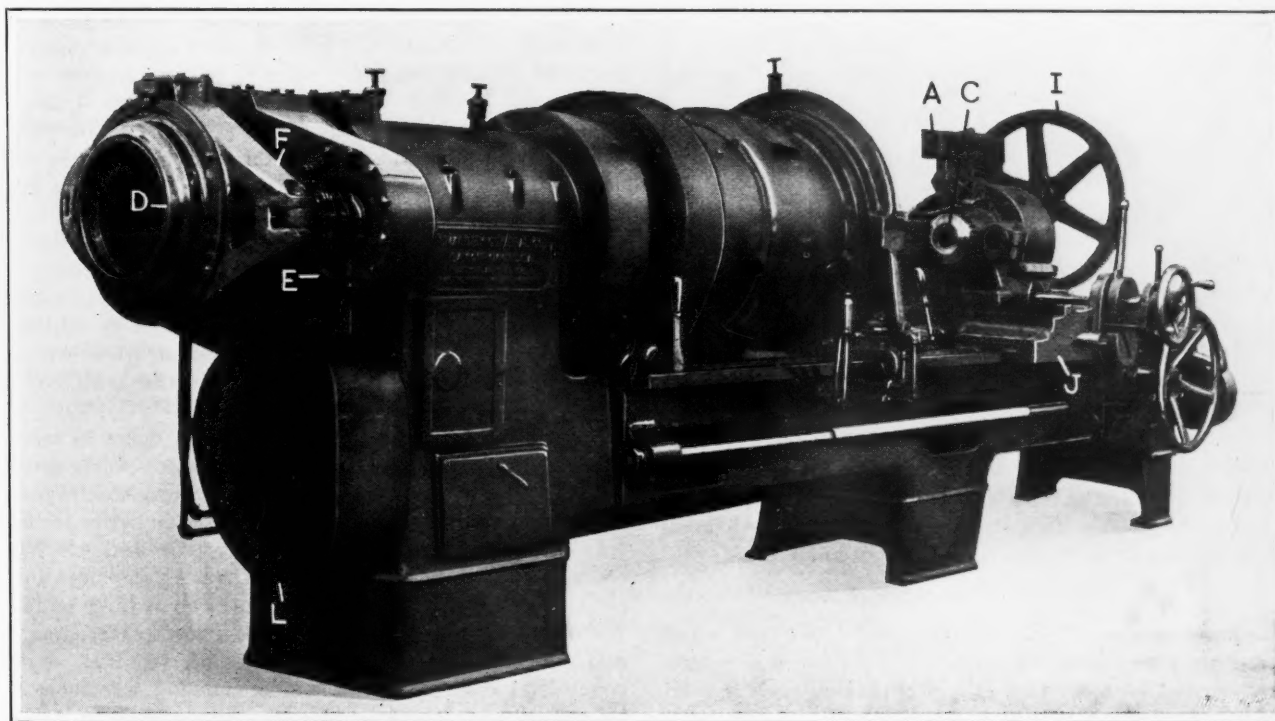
View of Pipe Threading Machine showing Position of Air Cylinders E that operate the Chuck
